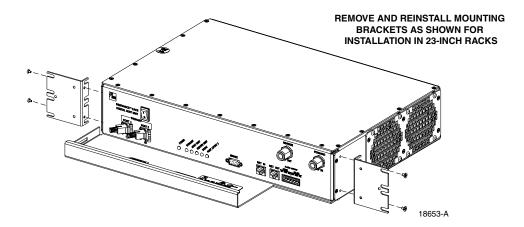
Installing the Mounting Brackets for 23-Inch Rack Installations
